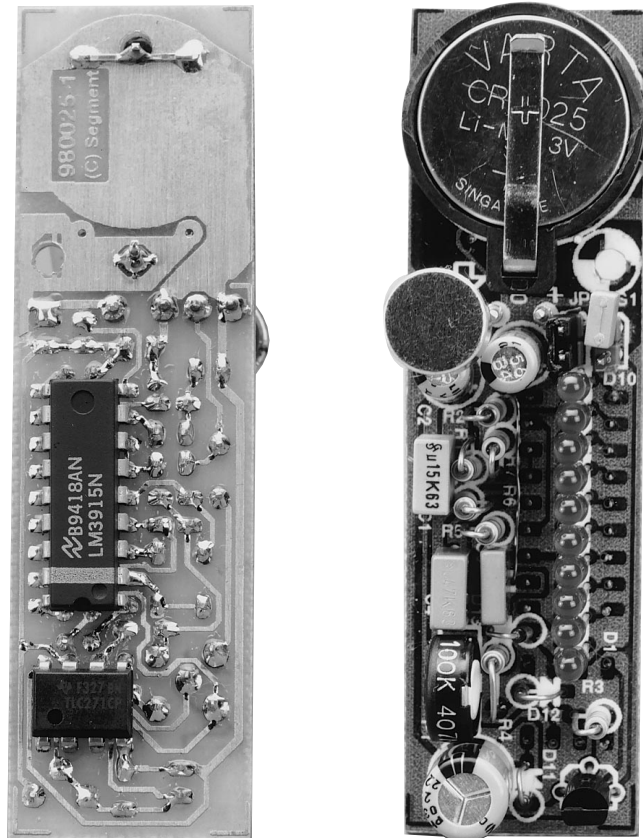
Both sides of the completed prototype board. Soldering the ICs in place requires a steady hand on a fine-tipped soldering iron.
